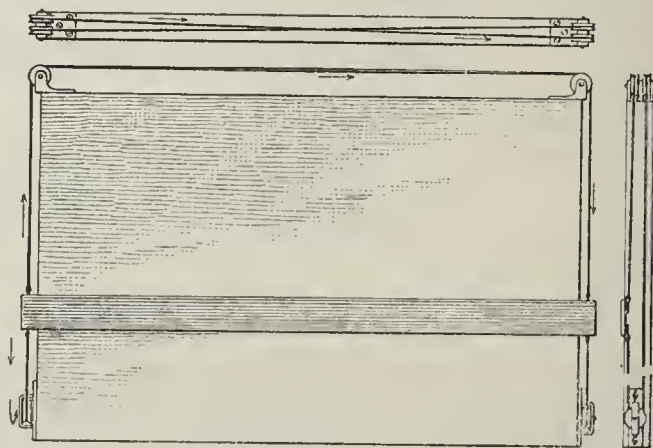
Drawing Board, with Movable Straight Edge Operated by Means of Cords and Pulleys.
